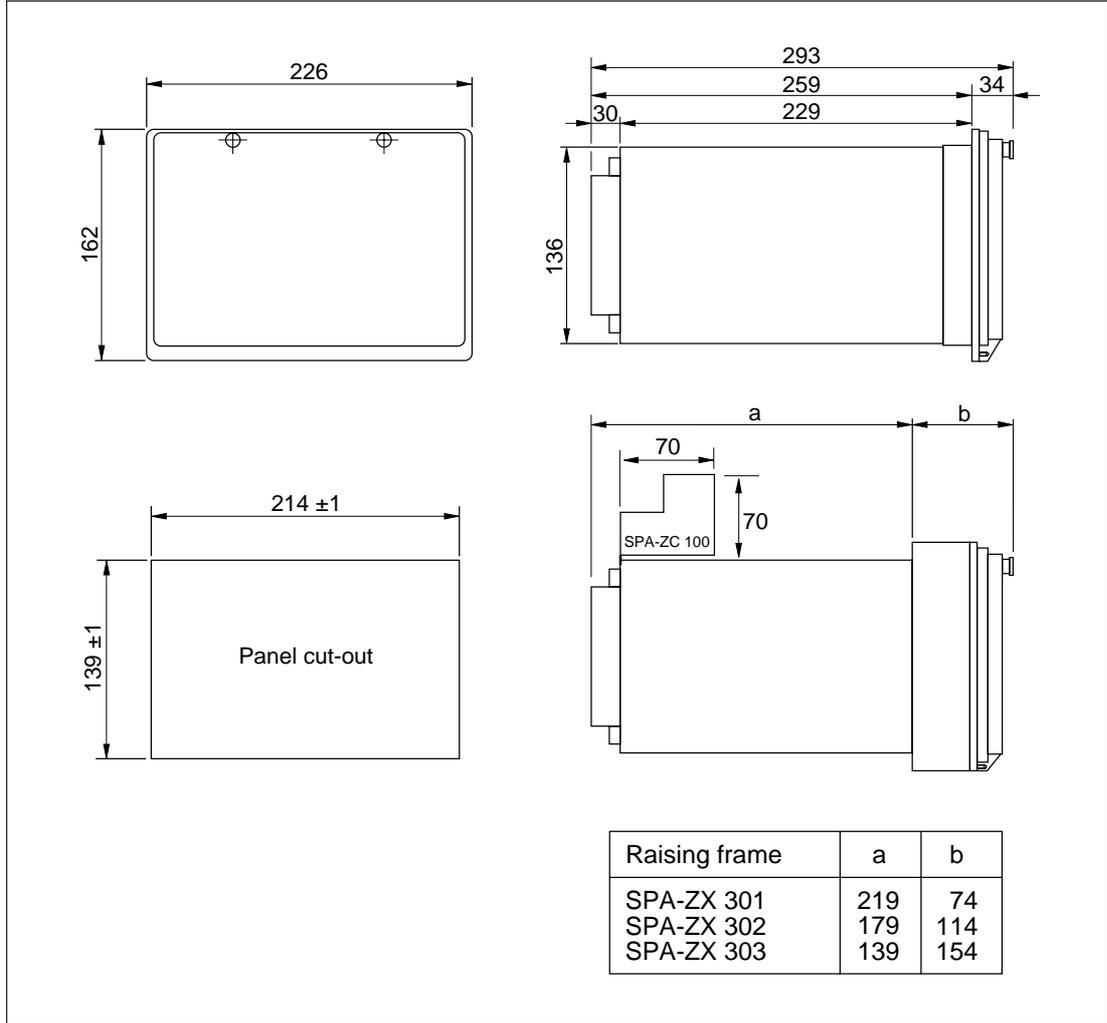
Dimension and mounting drawings for voltage regulator SPAU 341 C.
